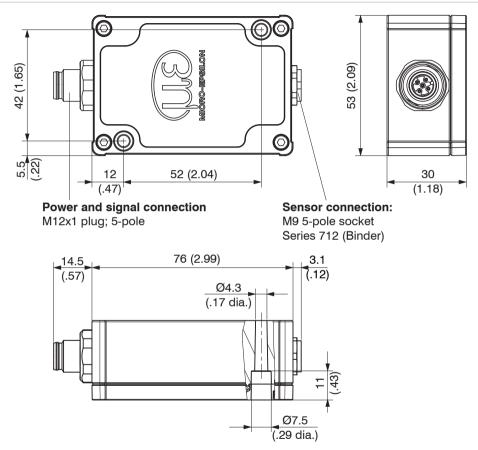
Dimensional drawing of MSC7401(010) controller, dimensions in mm (inches)
